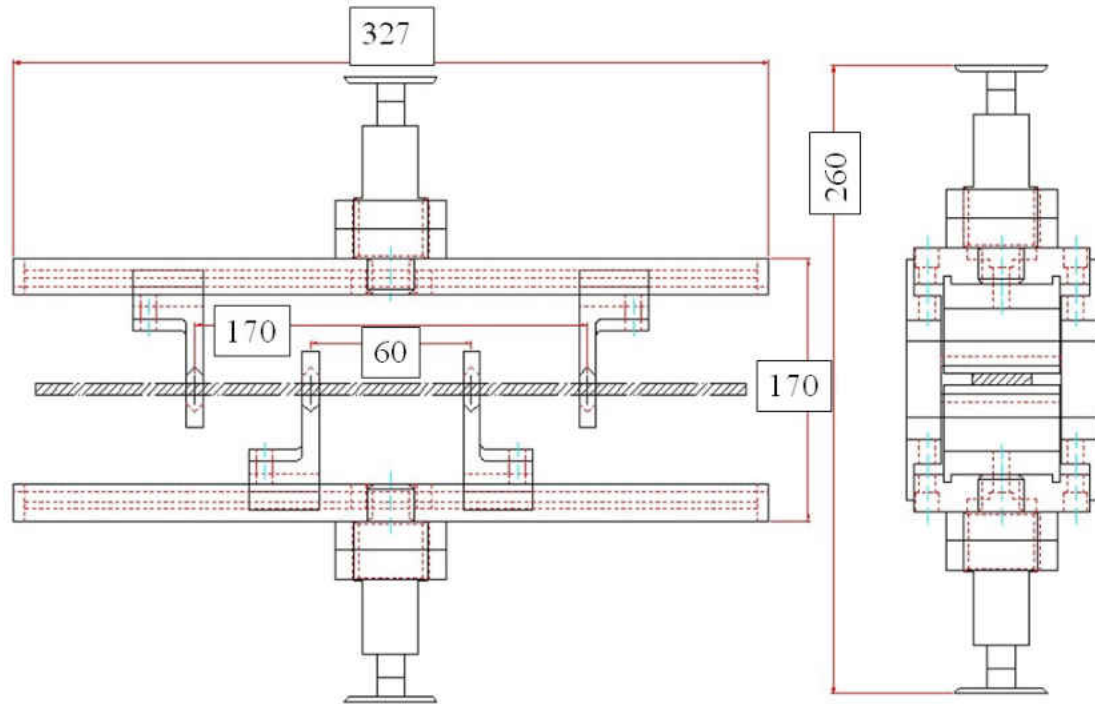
Fatigue fixture designed and manufactured to perform fully-reversed four-point bending test. All dimensions are in mm.
